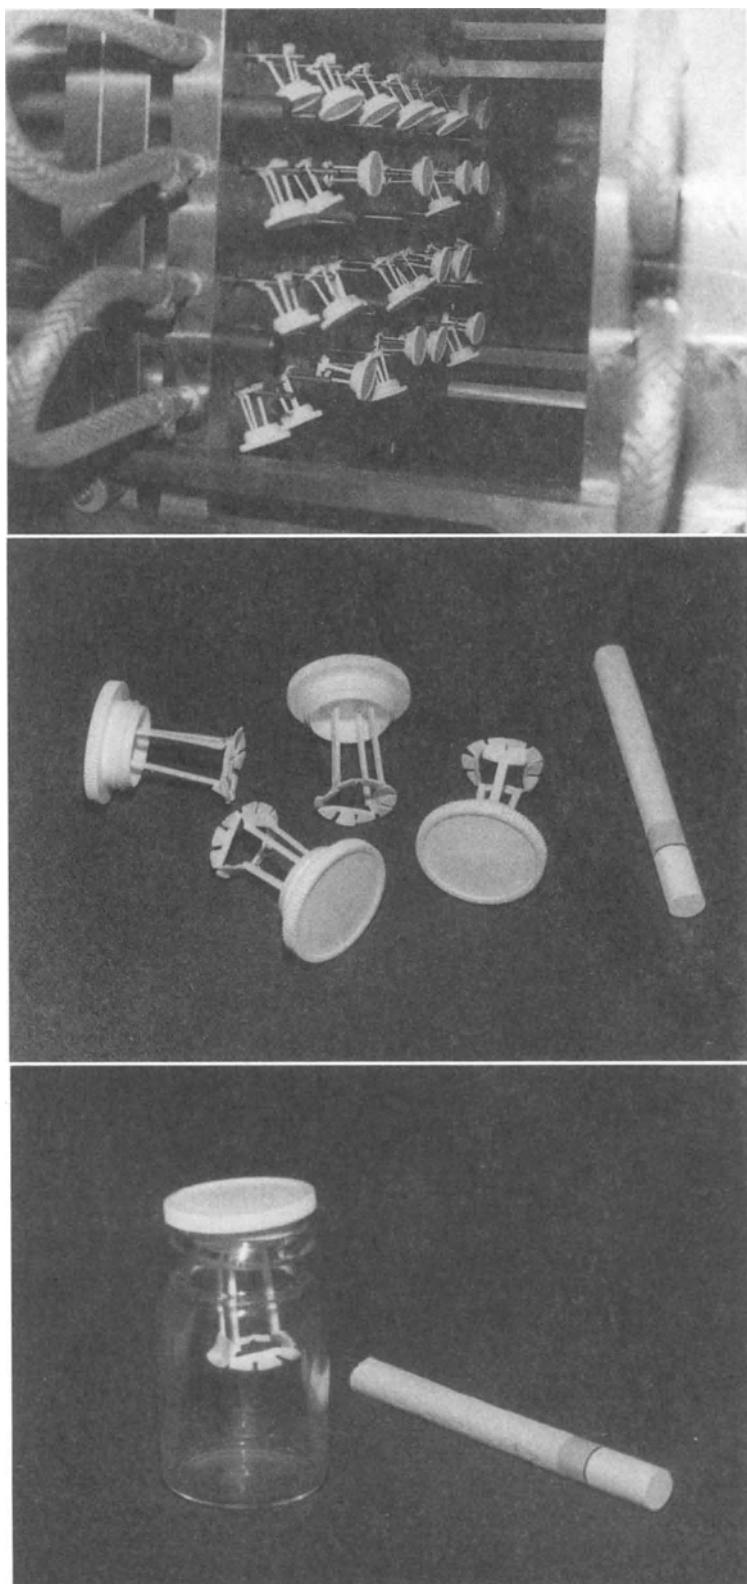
Three views showing flexible insert-type bottle caps made using a simple mold. It permits ejecting parts directly out of the mold without any complex mold movement.
